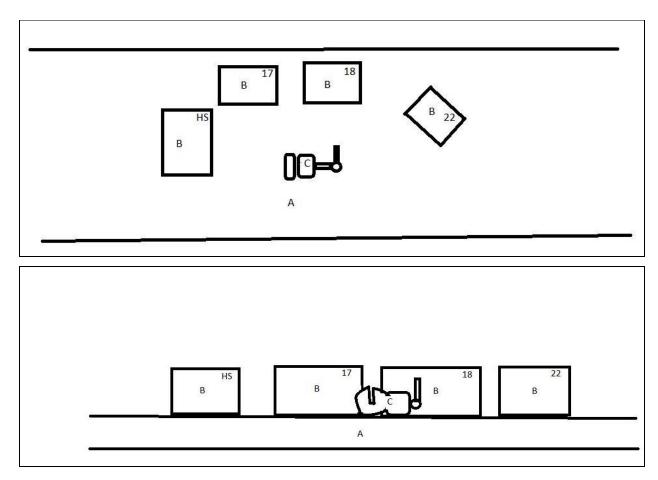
Top and front view for the workstation redesign with jigs and fixtures (video : toaster cage assembly v1
